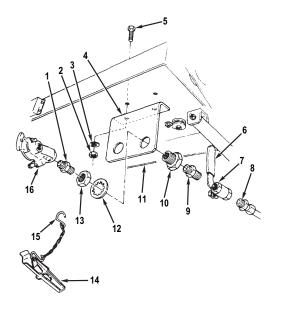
Rear Dolly Shutoff Valve and Mounting Bracket Removal.
